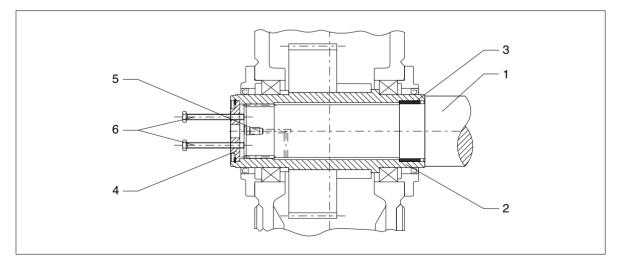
Hollow shaft with internal spline, demounting with end plate
